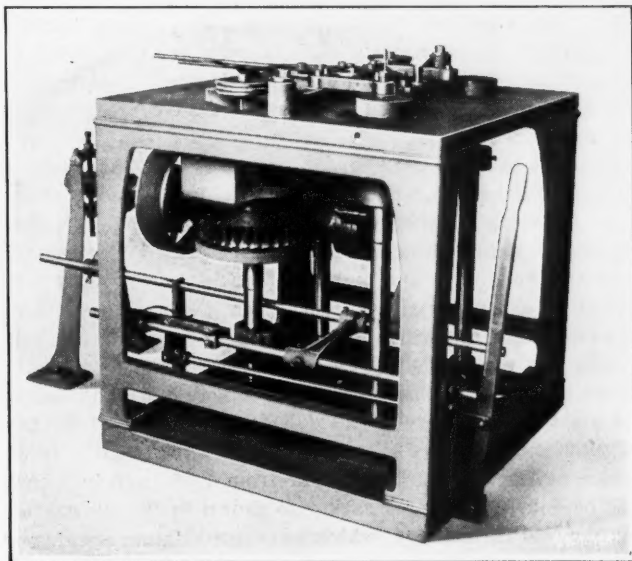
Tube-bending Machine built by the Davis-Bournonville Co.
